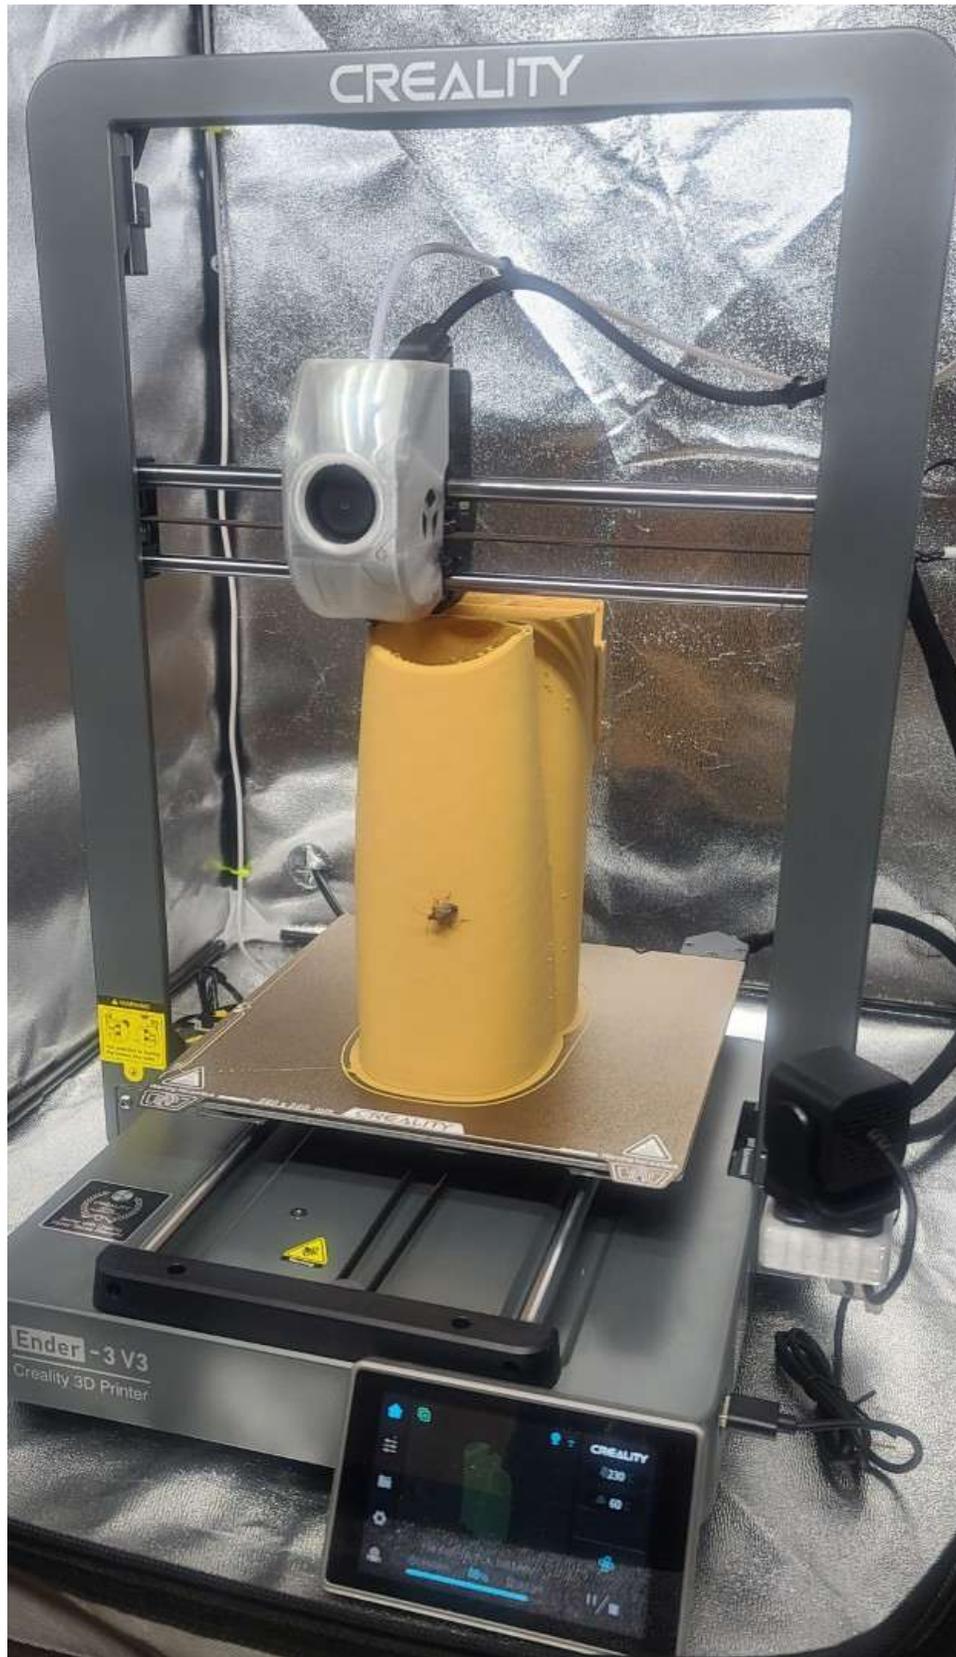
RQ-4 Fuselage Part Fus4 Printing
